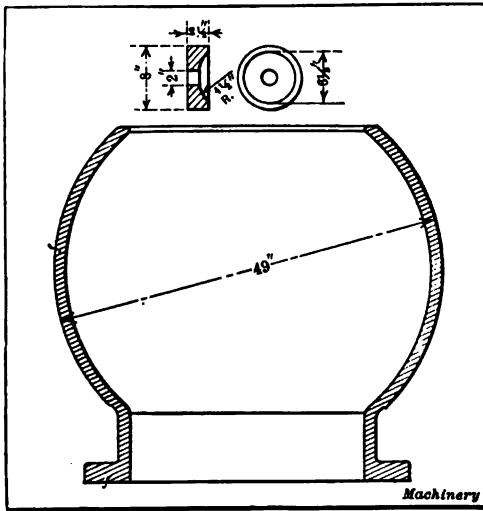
Cup Washer and Ball Pipe Joint—Examples of Concave and Convex Turning
